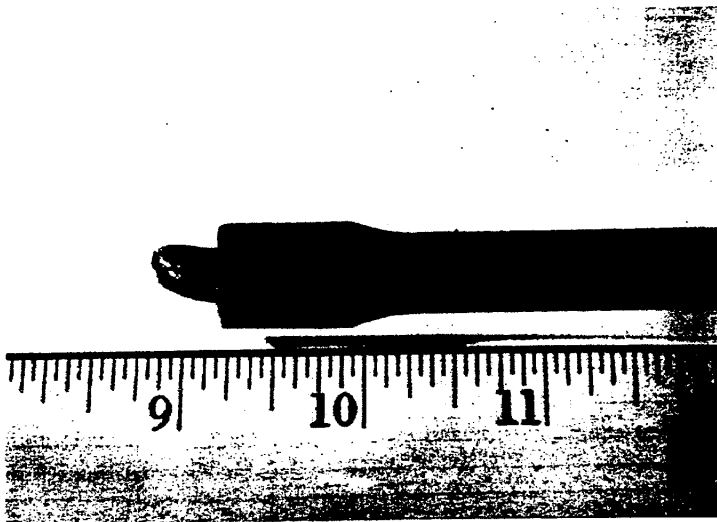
Photo B. Close-up of drive shaft fracture. Note ductility and melting at break area.
